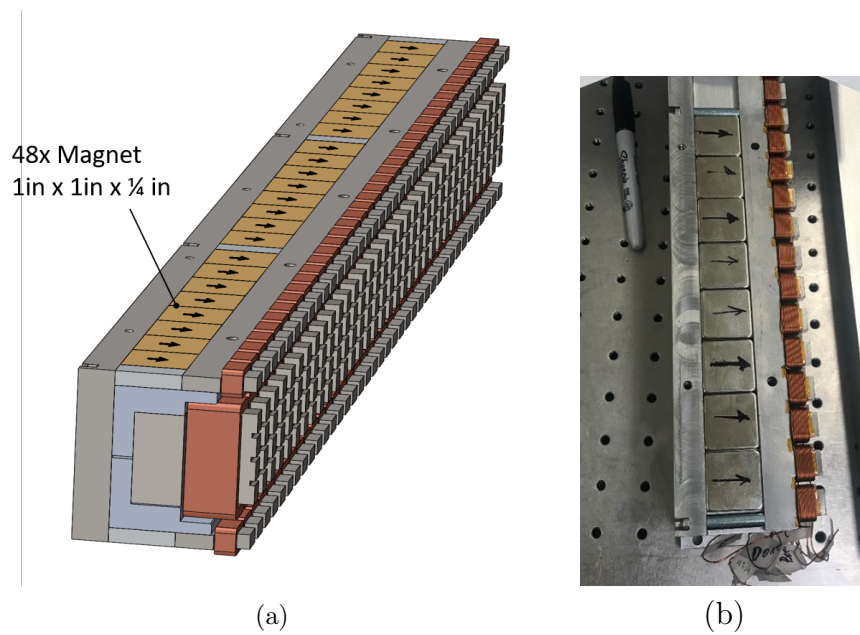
Assembly of the biasing permanent magnet in the stator assembly. (a) CAD model of the stator showing the permanent magnets. (b) Photograph of the assembly process for biasing permanent magnets.
